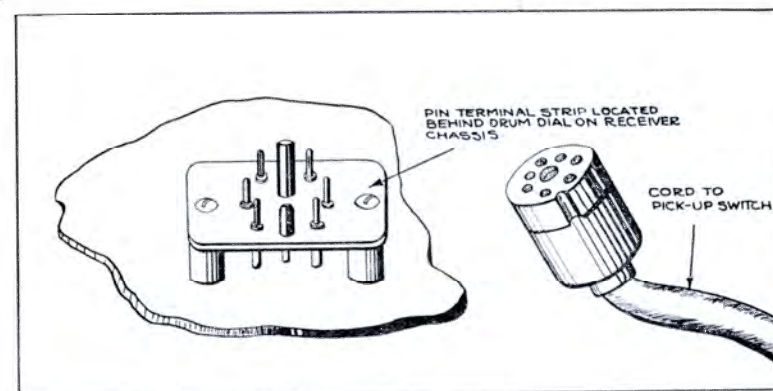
Multiple Connector Plug of Pick-up Switch Cord, and Strip mounting Pin Terminals with which it makes contact
